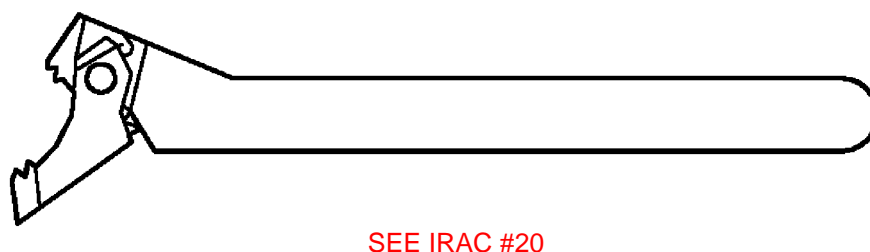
AIM-7F/7M/7M H-Build Wing Lock Tool
